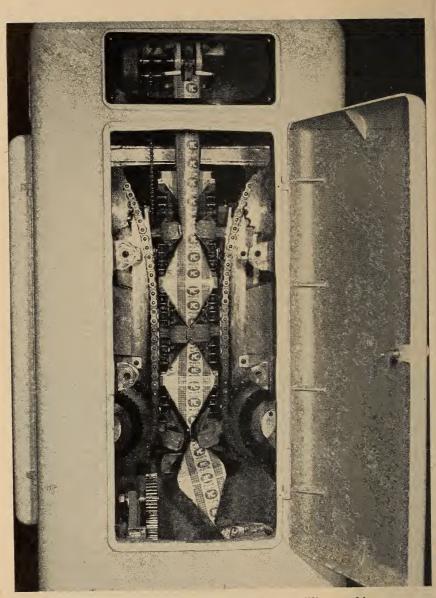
"Tetra Pak" carton forming and filling machine.
